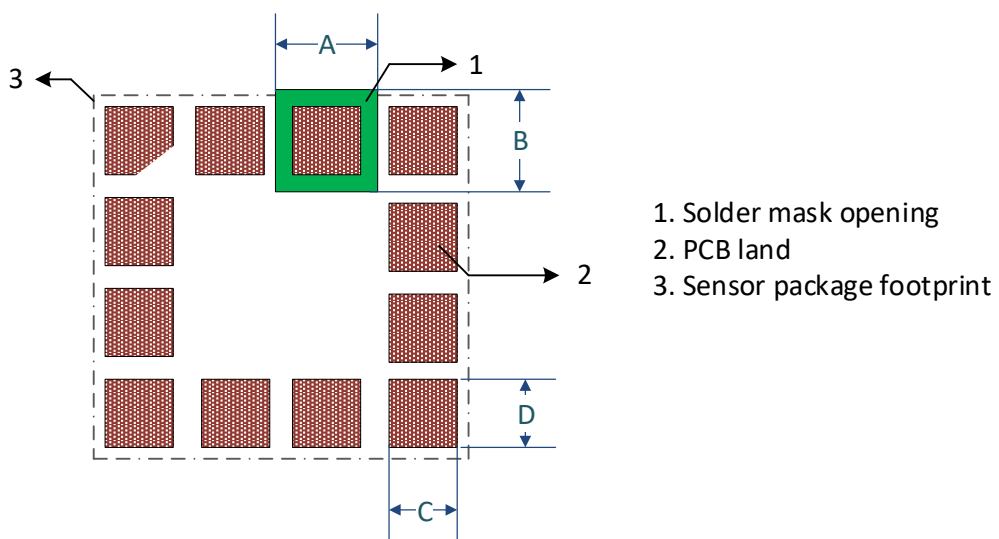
PCB land and solder mask recommendations for sensors with LGA package
